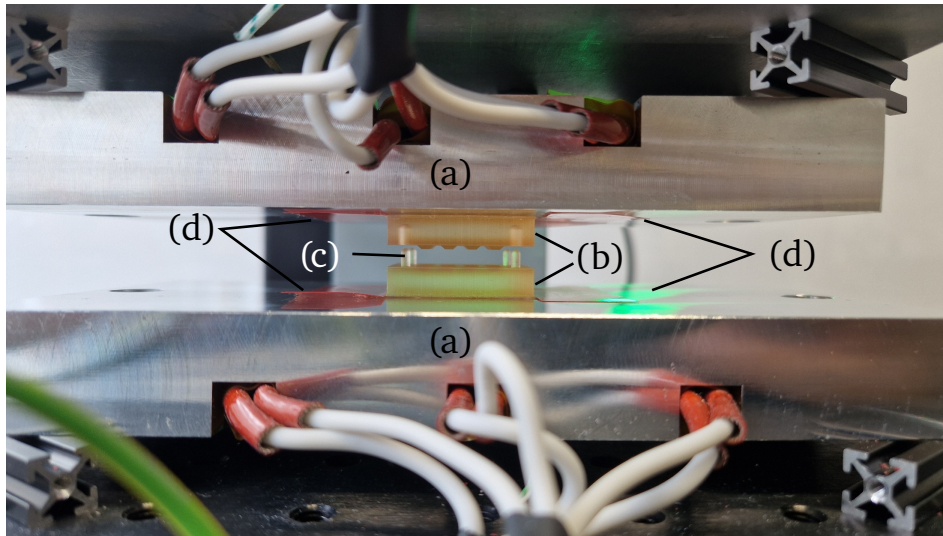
Hot forming setup: (a) heating elements, (b) upper- and lower molds, (c) location of substrate and (d) tape.
